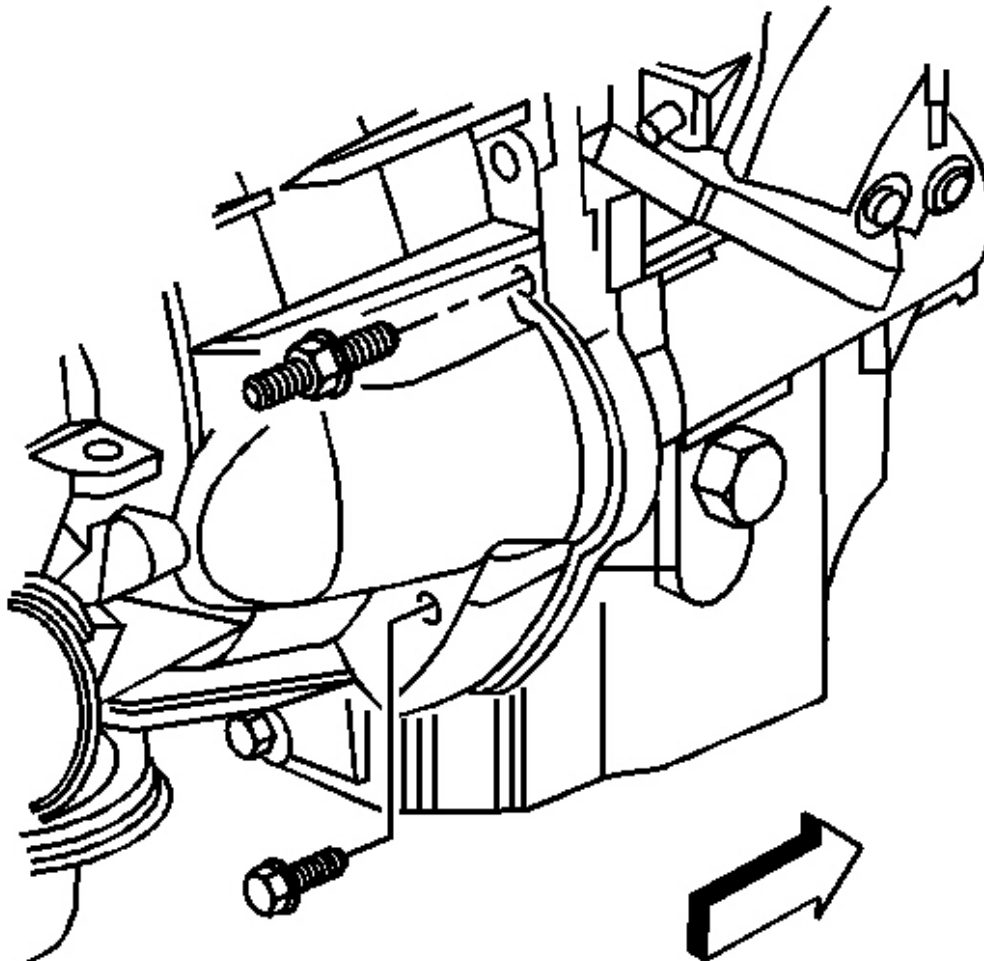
View of Transmission Bolt & Stud (4L60-E)
